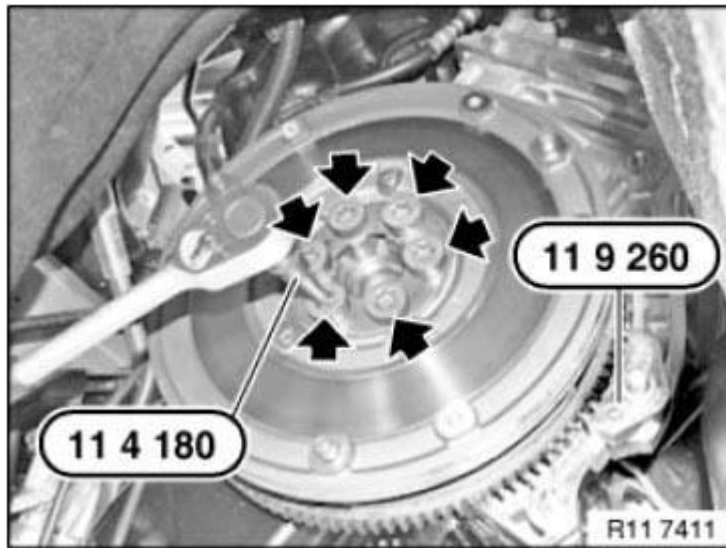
Removing Flywheel Bolts Using Special Tool 11 4 180
